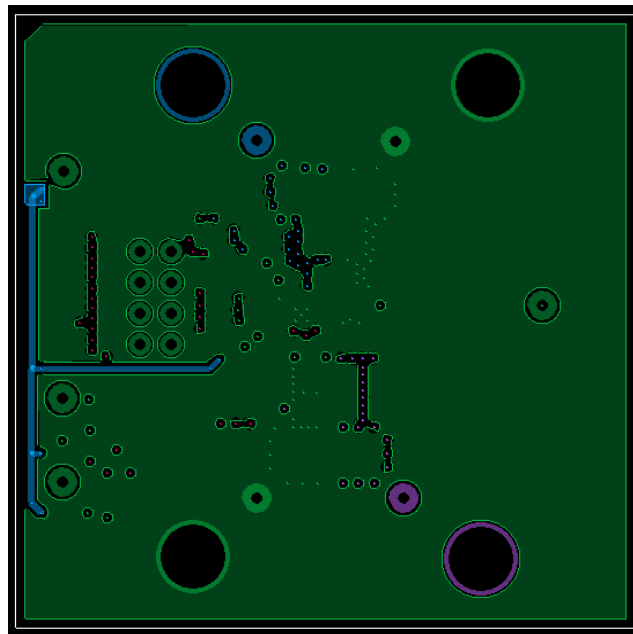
INNER LAYER 1 (TOP VIEW)
